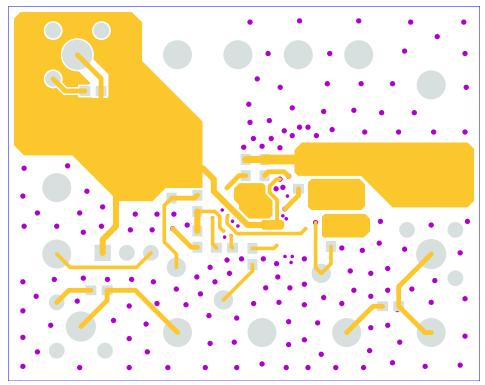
BOTTOM LAYER ETCH (MIRRORED)
